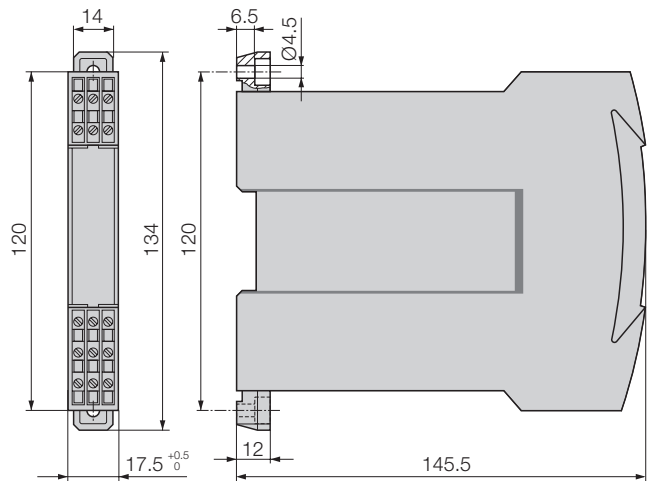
SINEAX SV 824 in housing S17 screw hole mounting brackets pulled out.
